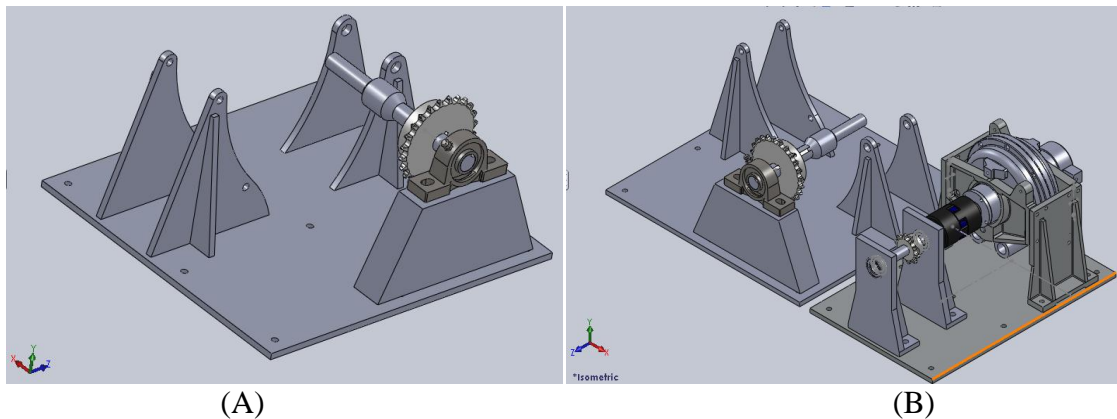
Engine cradle, output shaft, and bearing/support assembly (A). Engine cradle assembly, dynamometer mounting plate, dynamometer, and dynamometer input assembly (B)
